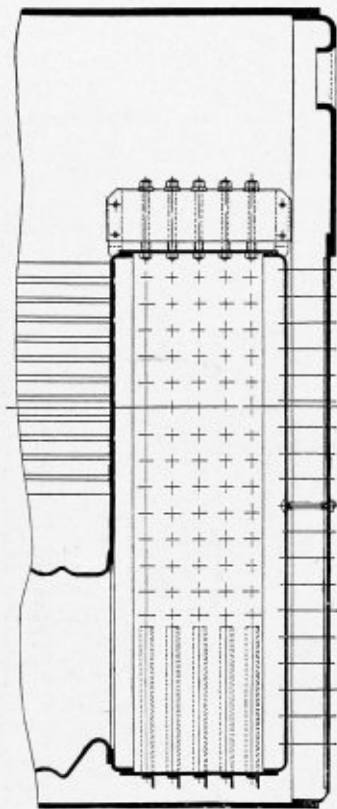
ORDINARY METHOD OF SUPPORTING TOP OF COMBUSTION CHAMBER.
